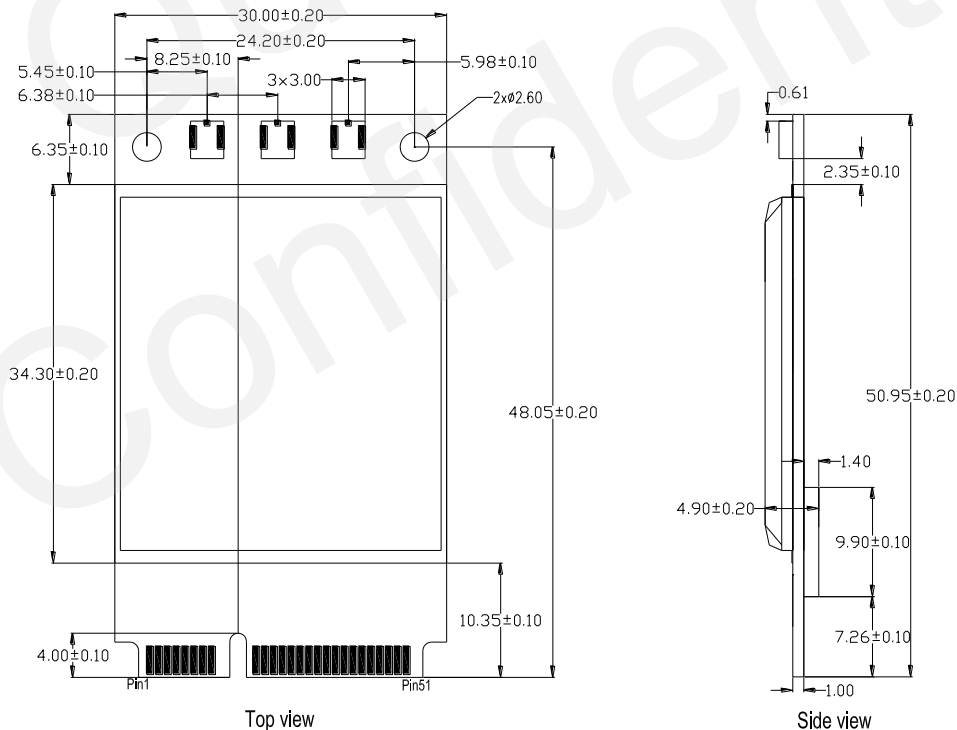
Mechanical Dimensions of EC20 Mini PCIe (Unit: mm)
